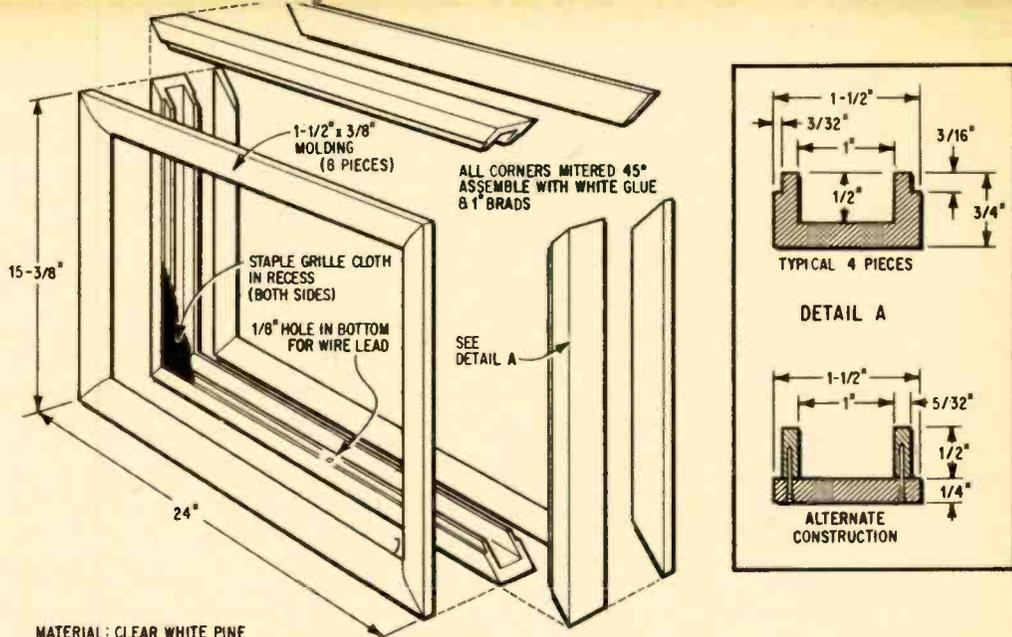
Complete frame details. If you have a bench saw, use $\frac{3}{4}$ x 2-in. furring strips for top, bottom and sides and use dimensions at top in detail A at right. Otherwise, use alternate construction shown.
